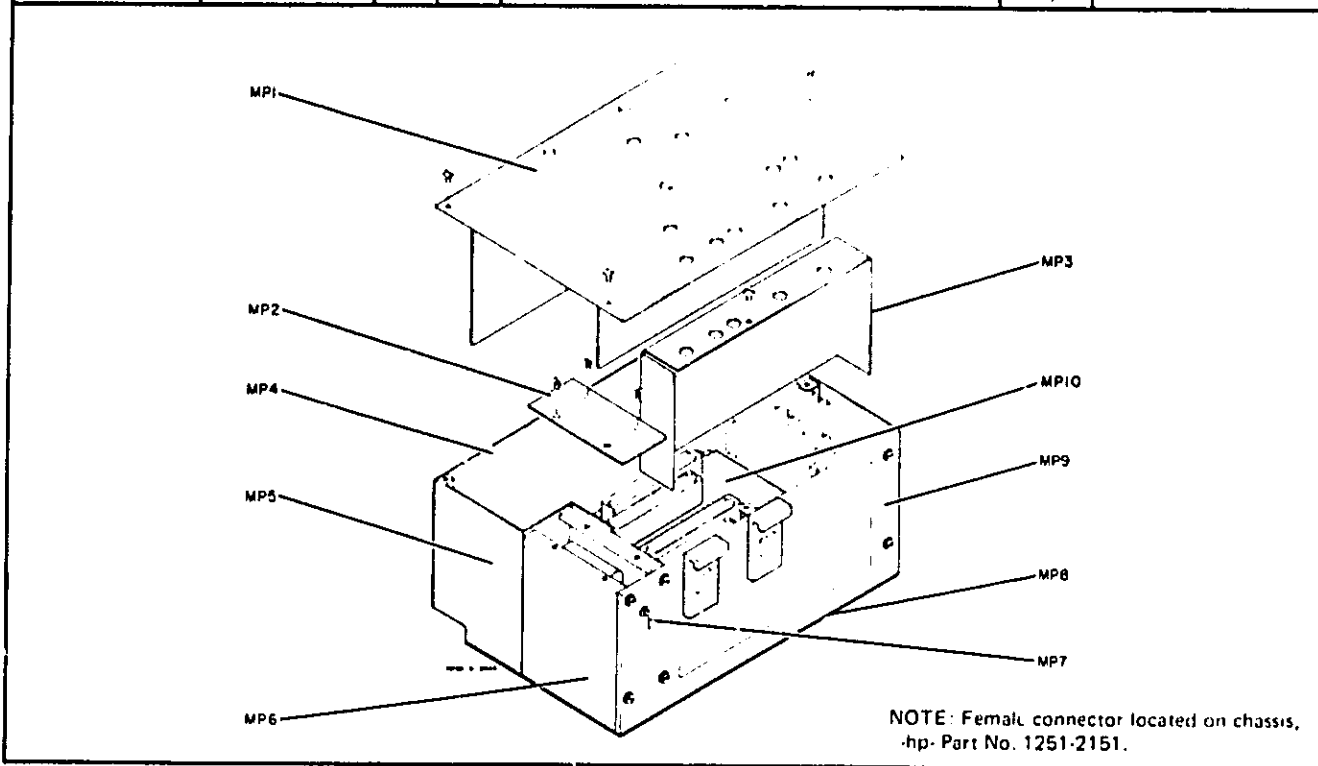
AC Chassis Assembly A90 Mechanical Parts Location.
